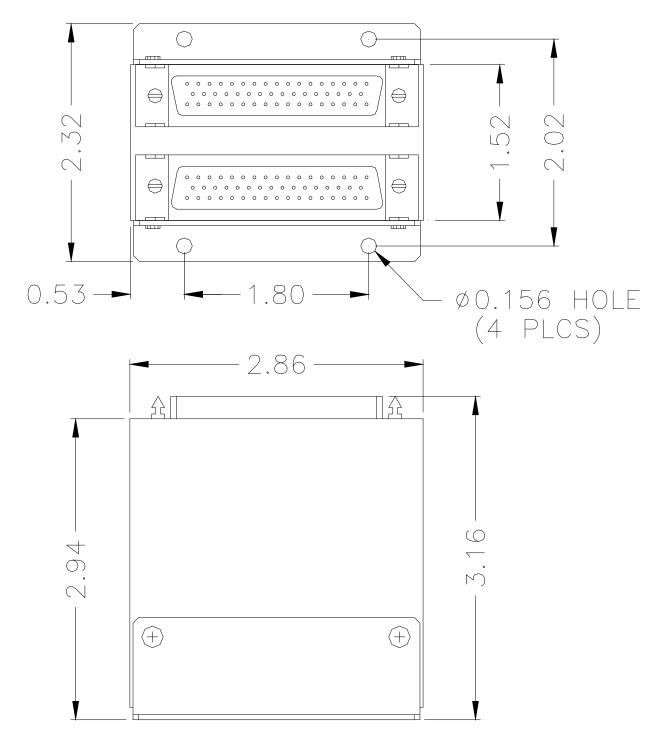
A OUTLINE DRAWING VERTICAL MOUNT
